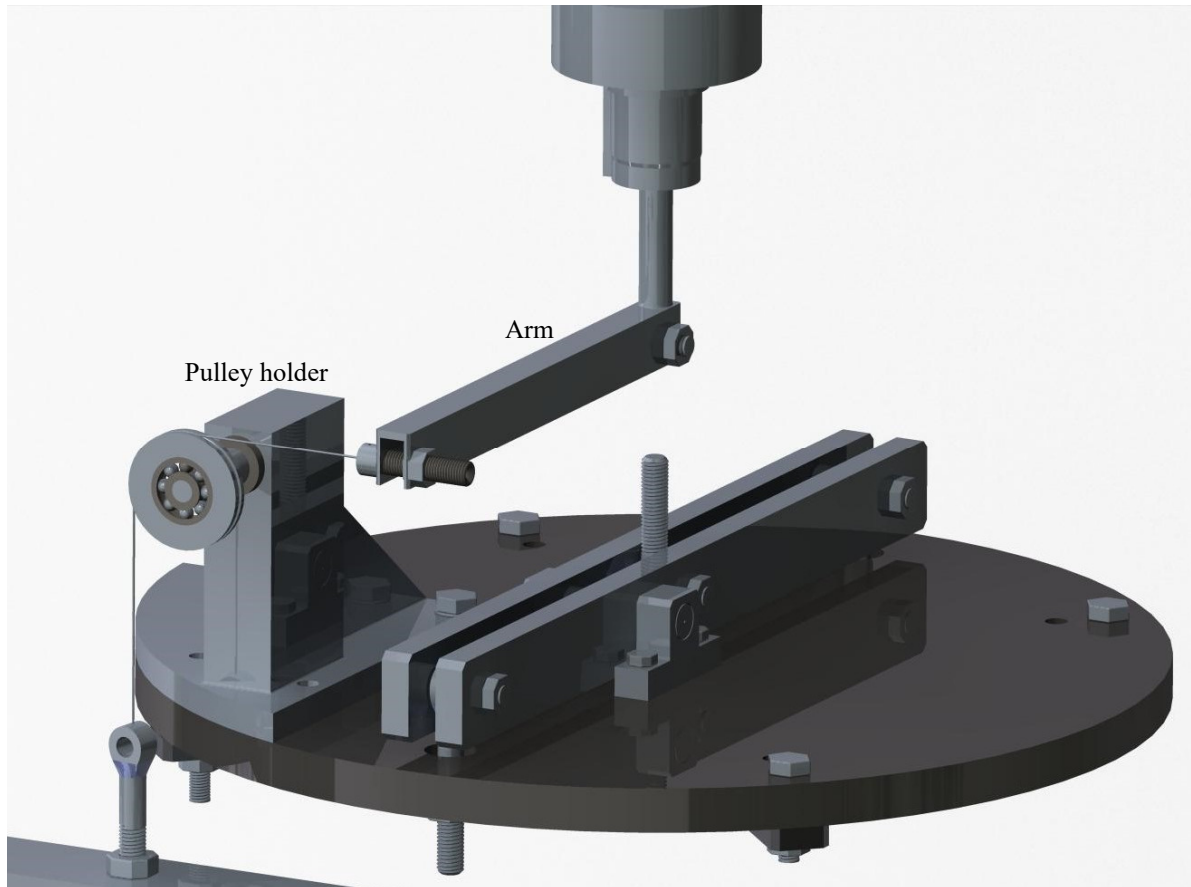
TTL Torque Calibration Jig with Axial Lever Arm
